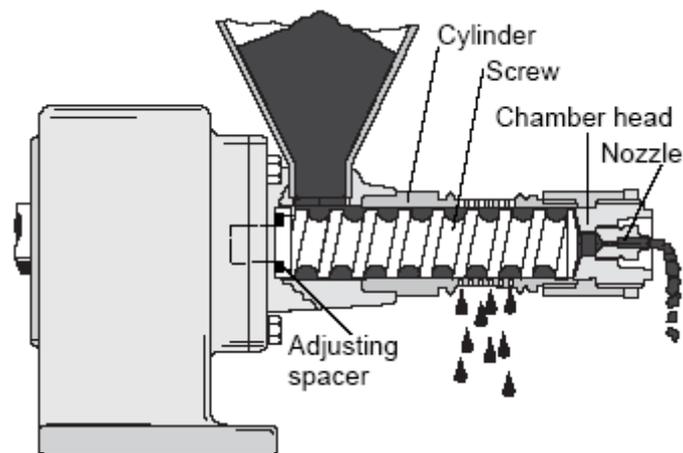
Cut-away view of the oil press Komet® S87G. Illustr: Kim Gutekunst.
